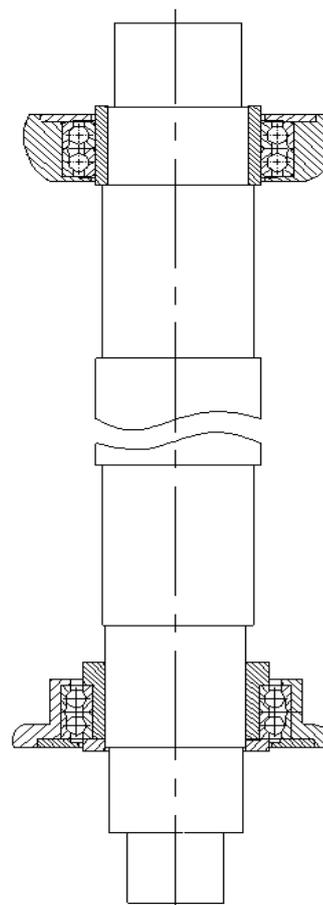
THE ROTOR STRUCTURE OF BLOWER FAN
